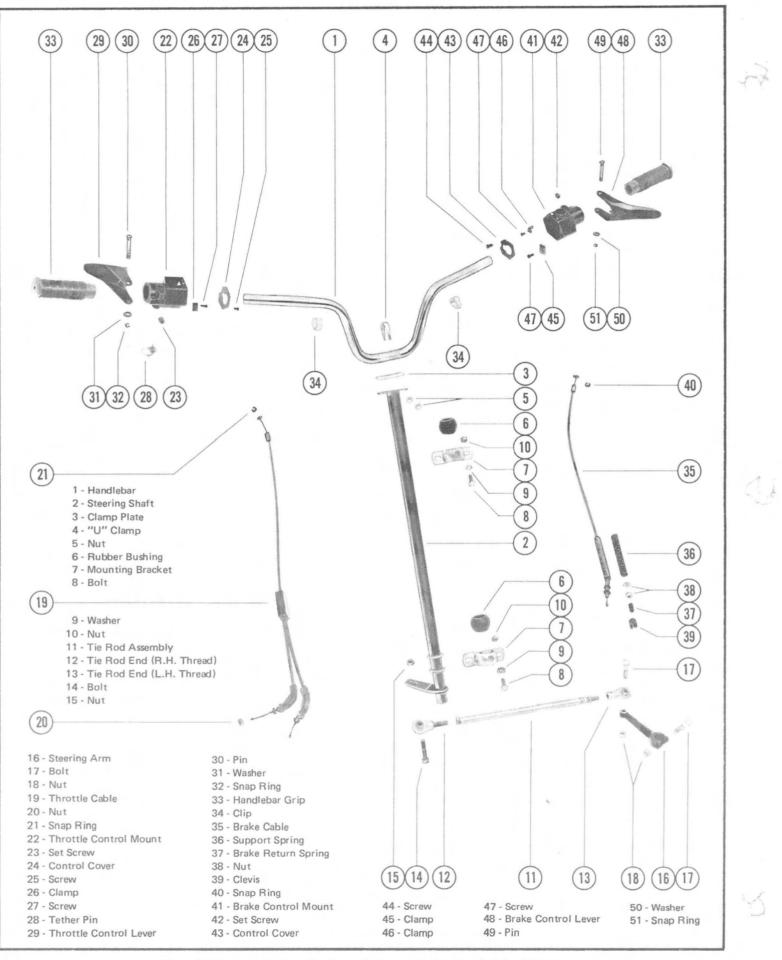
Tie Rod and Steering Shaft Components for Sno-Twister (400-D)
